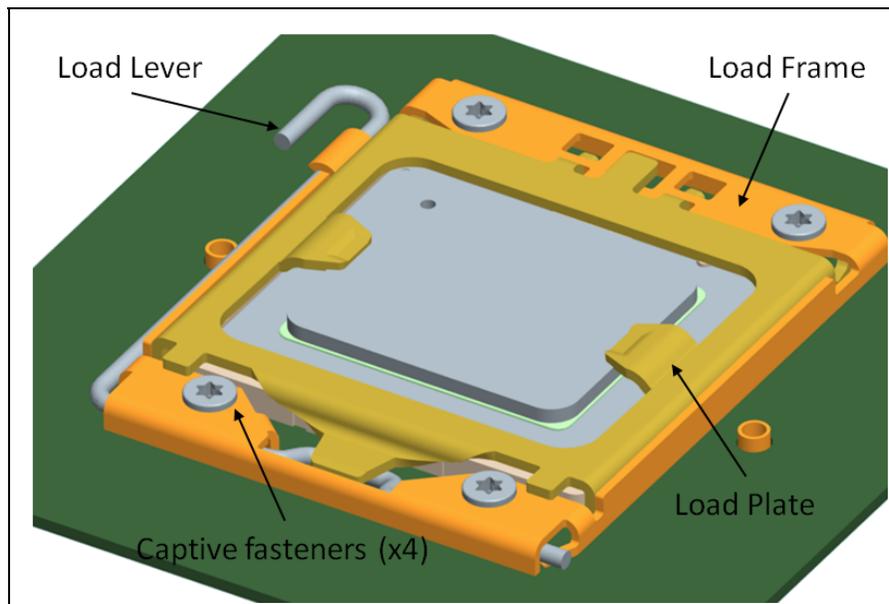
Low Profile ILM (LP-ILM) Assembly (shown with PCB and Processor)
